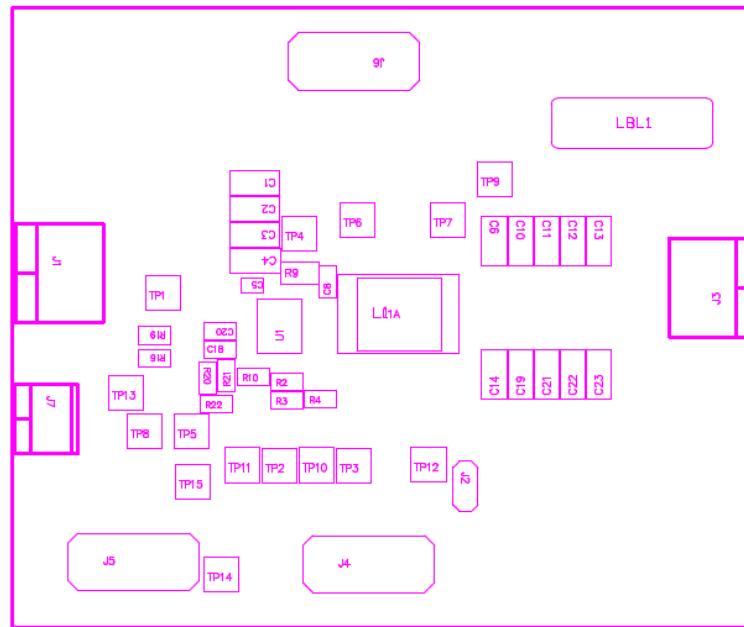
TPS548A20EVM-587 Top-Layer Assembly Drawing
